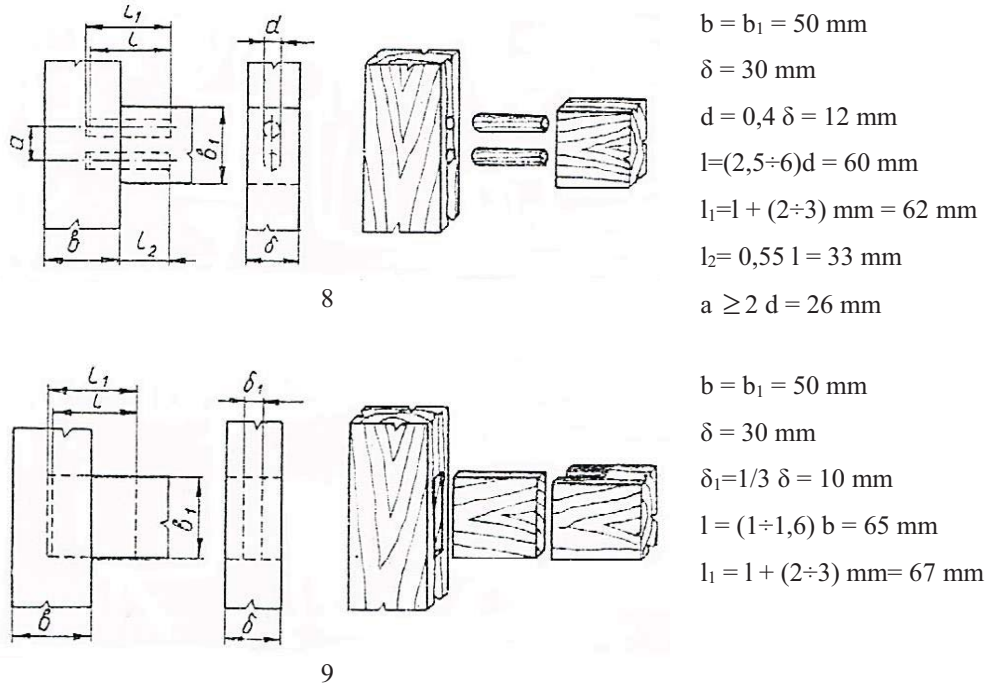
T-shape corner splined joints: 8 – dowel joint; 9 – splined joint
